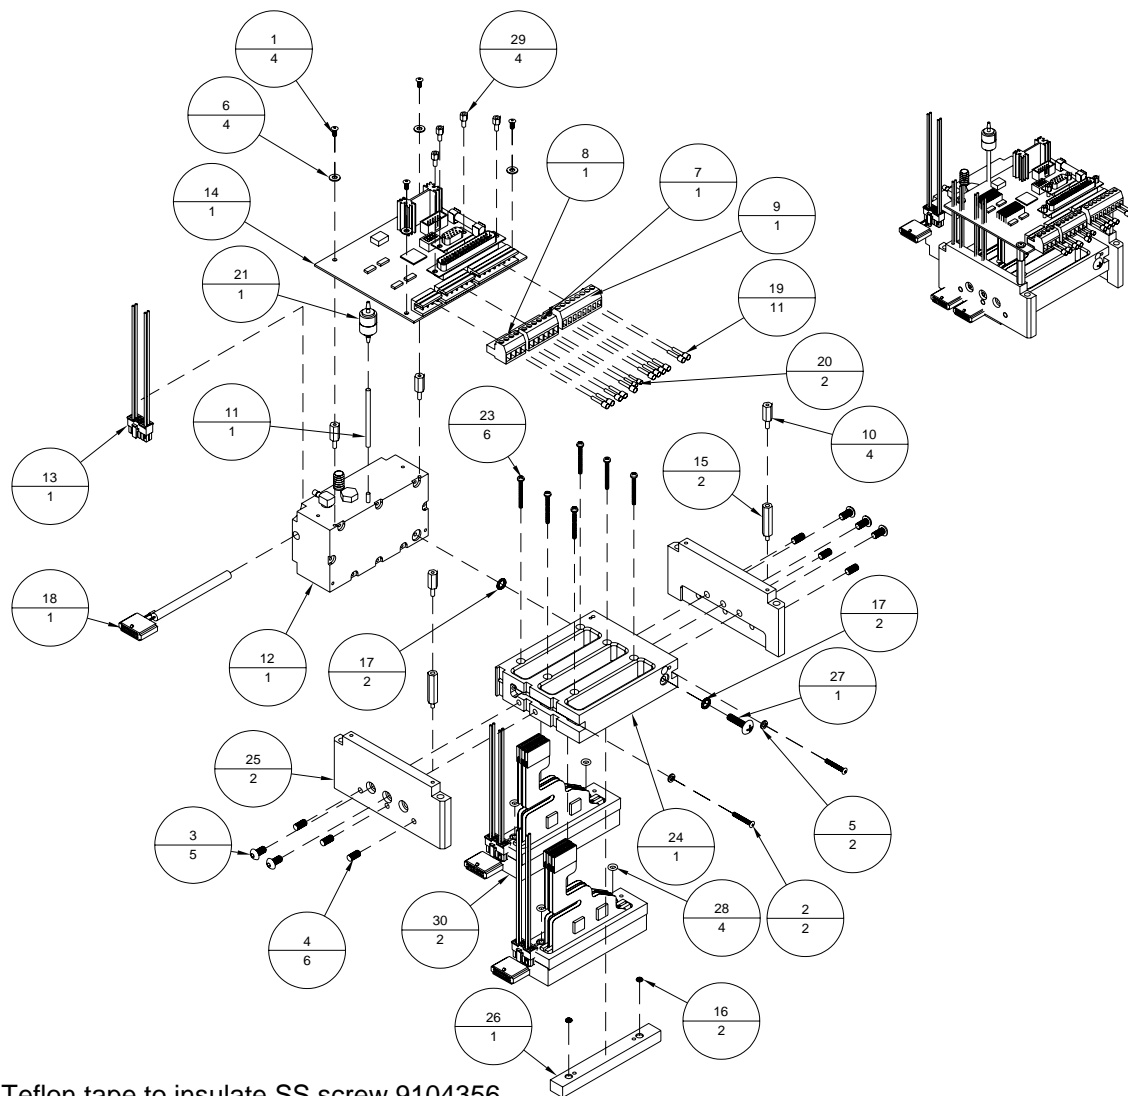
Manifold Assembly, Adjustable, 30 pL, Cezanne 2250 (9105158A)
